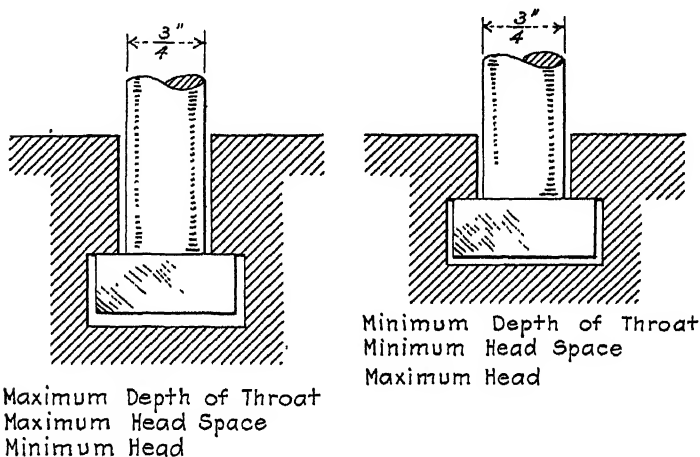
MAXIMUM AND MINIMUM DEPTH OF THROAT AND CLEARANCES,  $\frac{3}{4}$ -IN. T-BOLT
